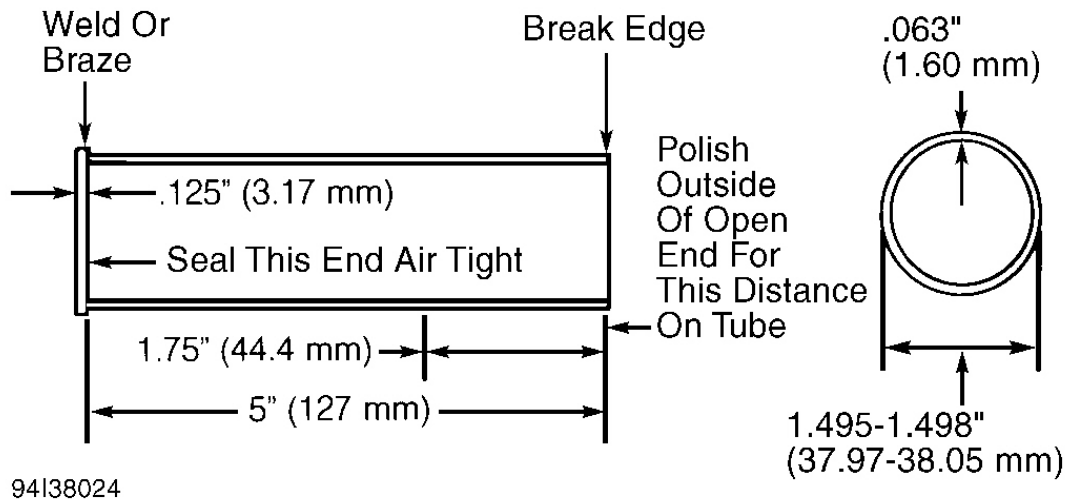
Fabricating Torque Converter Hub Seal Cup
